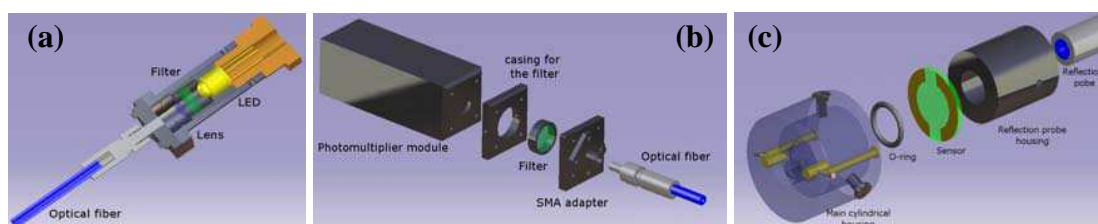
(a) Illumination assembly containing LED, (b) Detection unit containing the photomultiplier module and (c) Sensor head unit containing the QD transducer.
